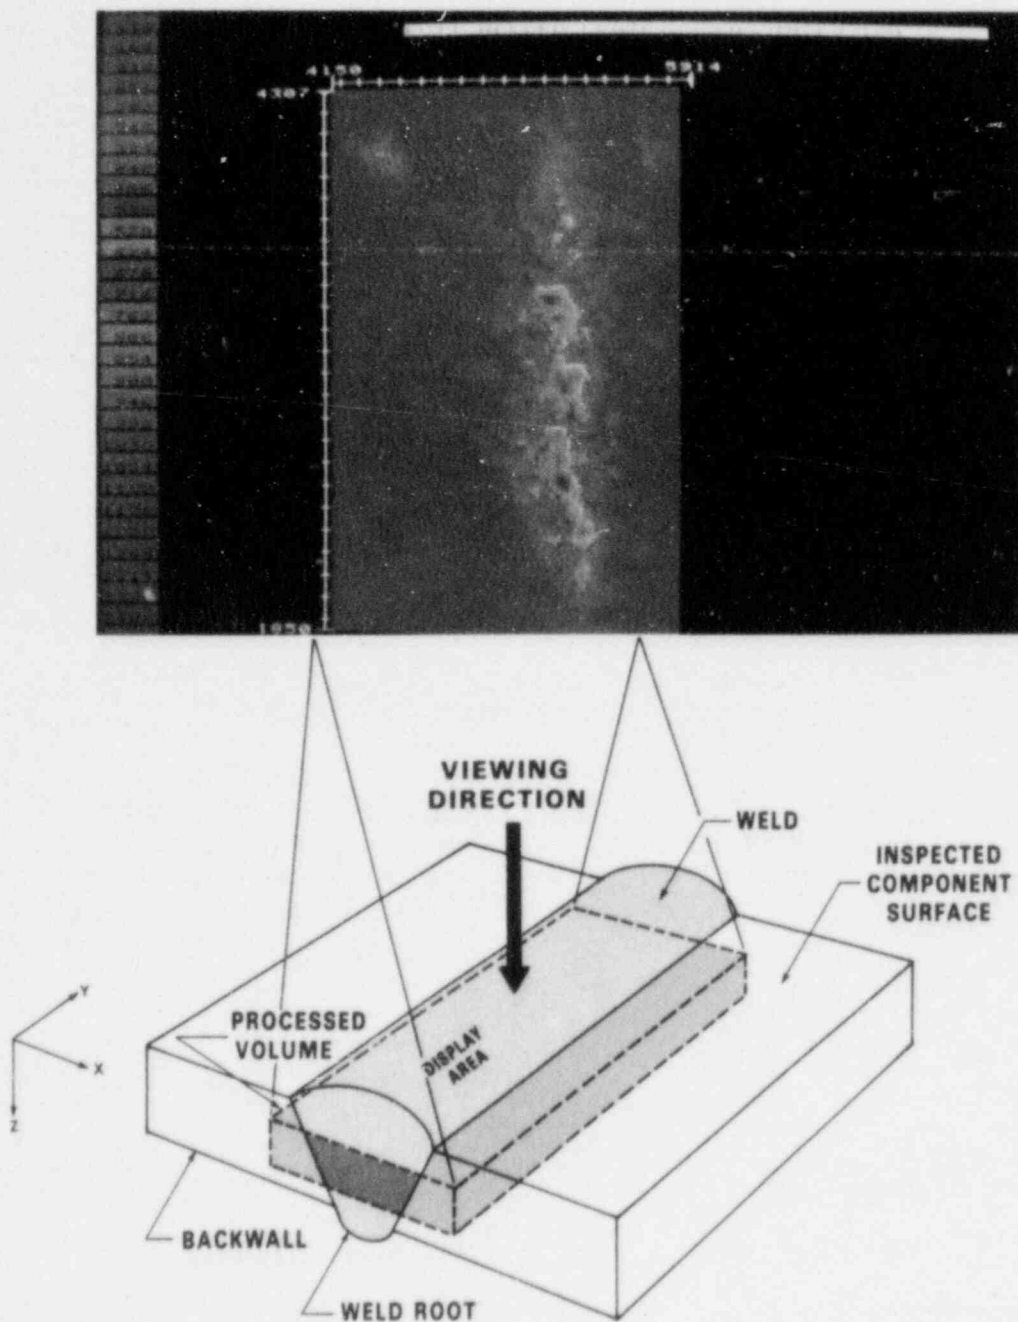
BUTT-WELDED CARBON STEEL PLATE SPECIMEN - SLAG INCLUSION SECTION (C-Scan View)
